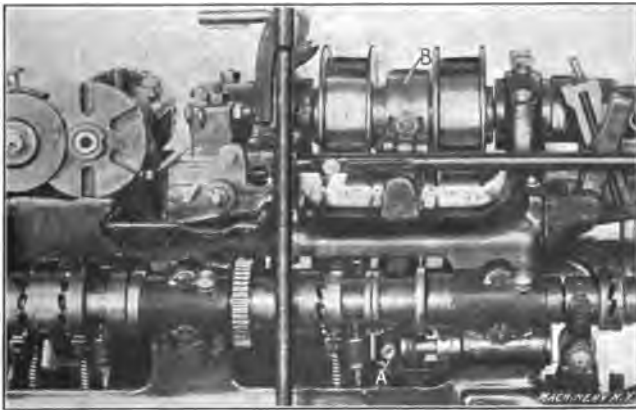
Rear View of No. 00 Brown & Sharpe Automatic Screw Machine showing Reversing Mechanism
